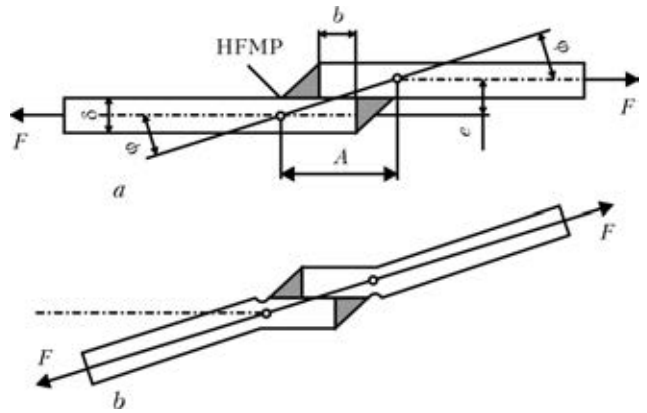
Samples of overlap welded joint in as-welded condition (*a*) and after HFMP of fusion zones (*b*)
